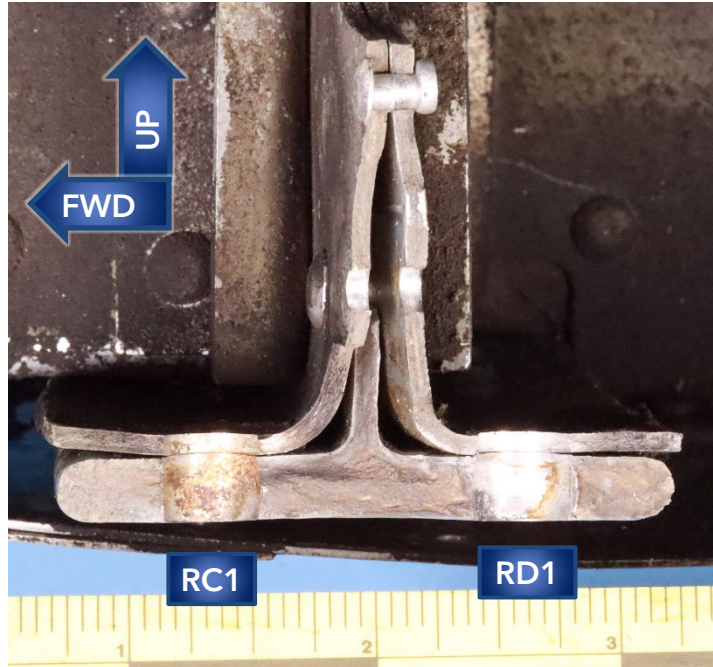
Right wing main spar lower cap fracture surface as viewed looking outboard.
